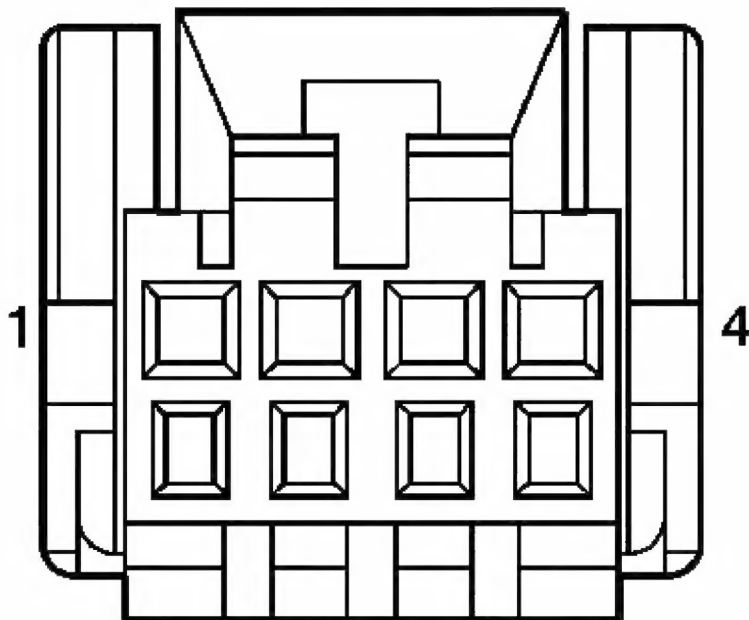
Remote Control Door Lock Receiver (RCDLR) Connector End View
